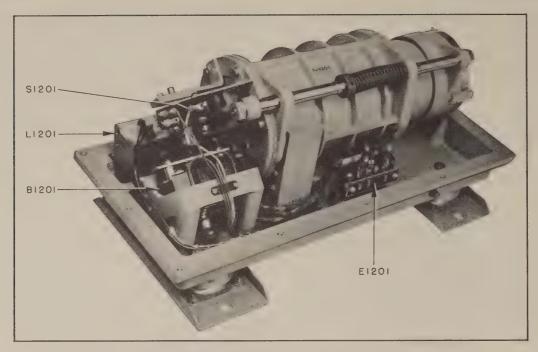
Tuned Cavity FR-66/UP: Component Locations
